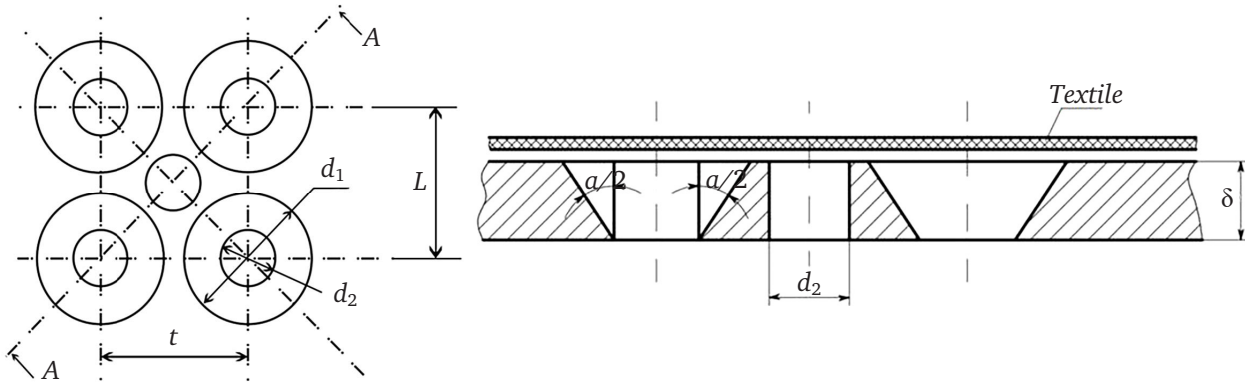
An elementary cell containing holes inside the thickness δ in the lower cushion of the device for forming three-dimensional parts of clothing using the vacuum method
